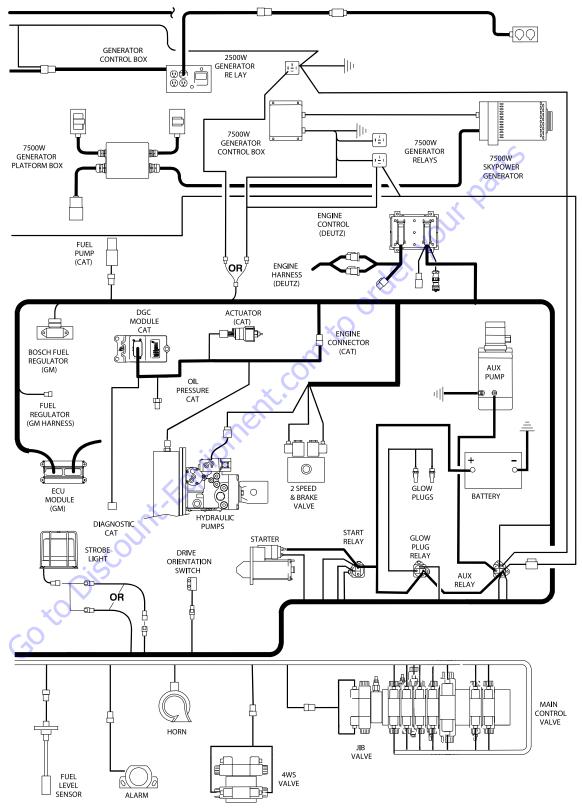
Electrical Components Installation (With UGM) - Sheet 2 of 2
